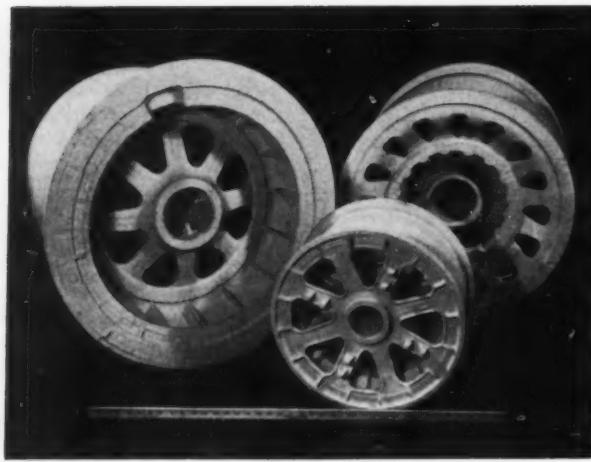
MAGNESIUM AIRCRAFT-LANDING-WHEEL CASTINGS
